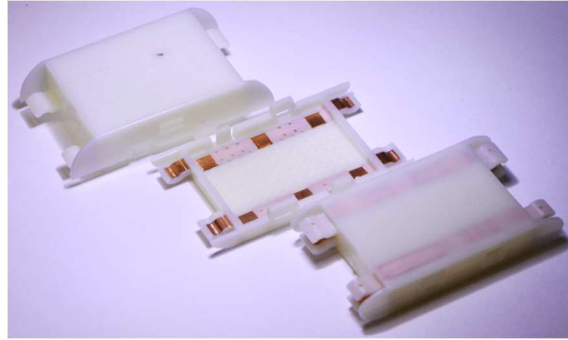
Injection moulded packaging: UBS power bank half-packaging (left), Li-ion cell half-packaging (middle), and assembled Li-ion cell packaging (right)
